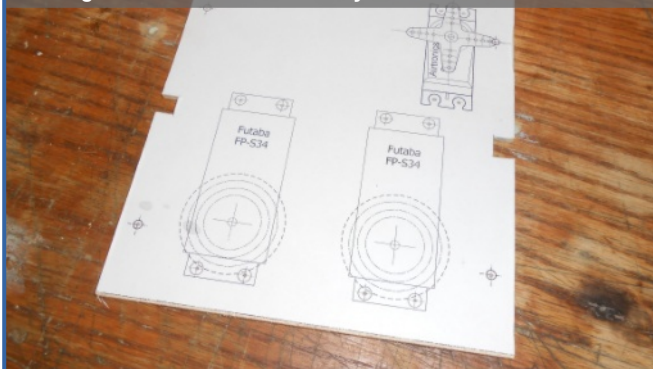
1/8" lite ply doesn't provide enough support for the servo mounting screws so I backed up the tray with 1/4" plywood blocks to give the screws something to dig in to.
